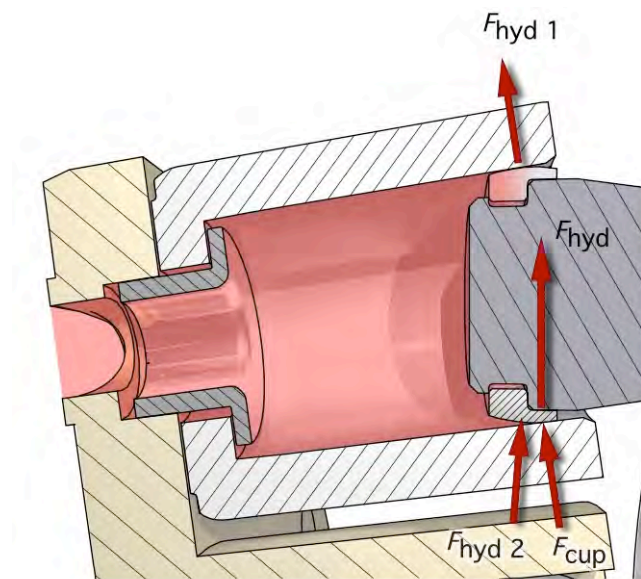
Radial forces between cup and piston ring caused by the hydraulic pressure inside the cup.
